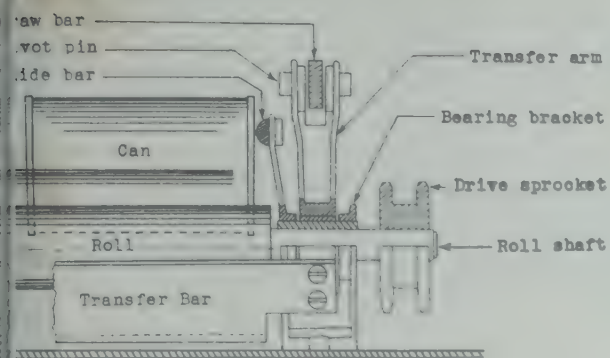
Agitating vacuum process. Thermo-Roto machine. Diagrammatic view of one end of a roller and a transfer bar. Chain Belt Company.
